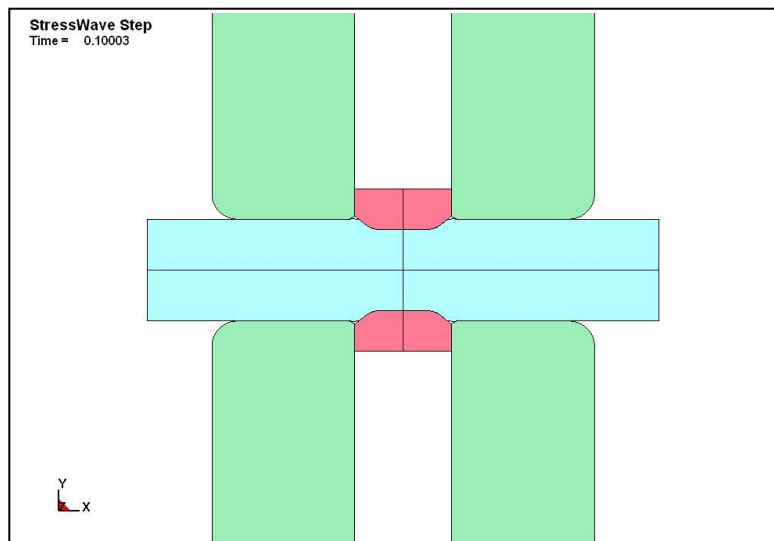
Element Model View – Pressure Foot Tool (Full View)
